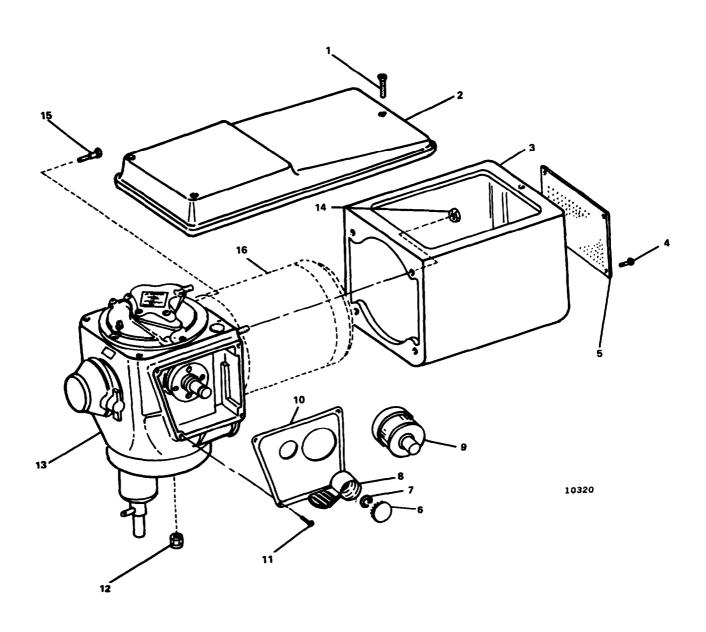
Mechanical Transmission and Motor Housing.
